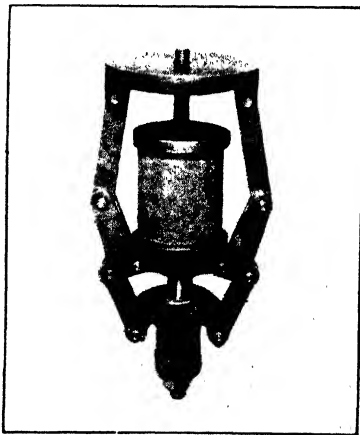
A rubber drawing attachment with toggle links designed to keep a nearly uniform pressure.
